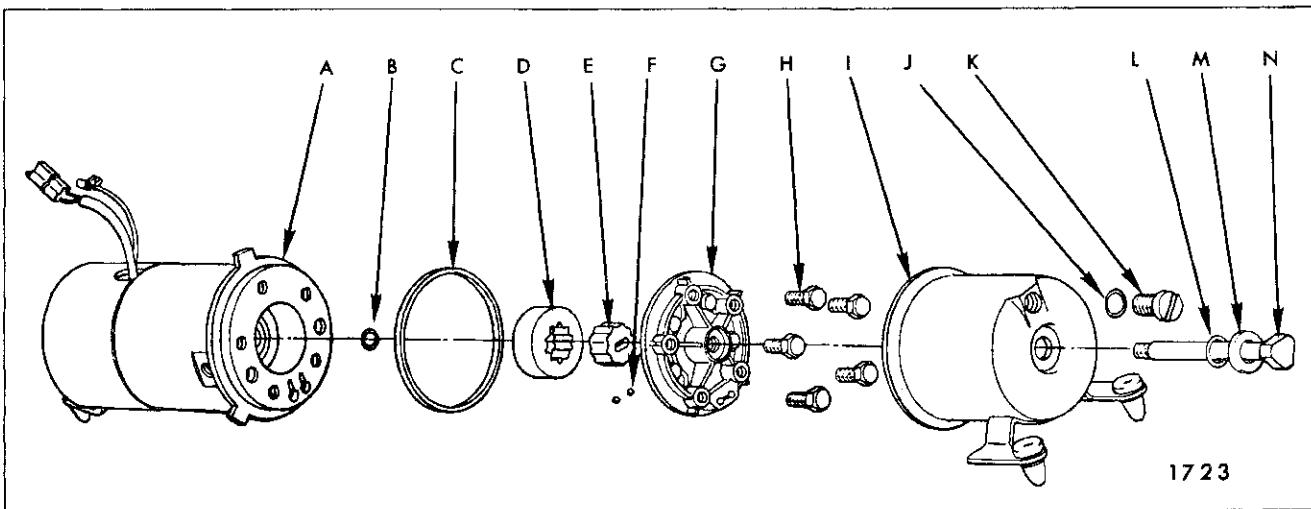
Hydro-Lectric Motor And Pump Disassembled
